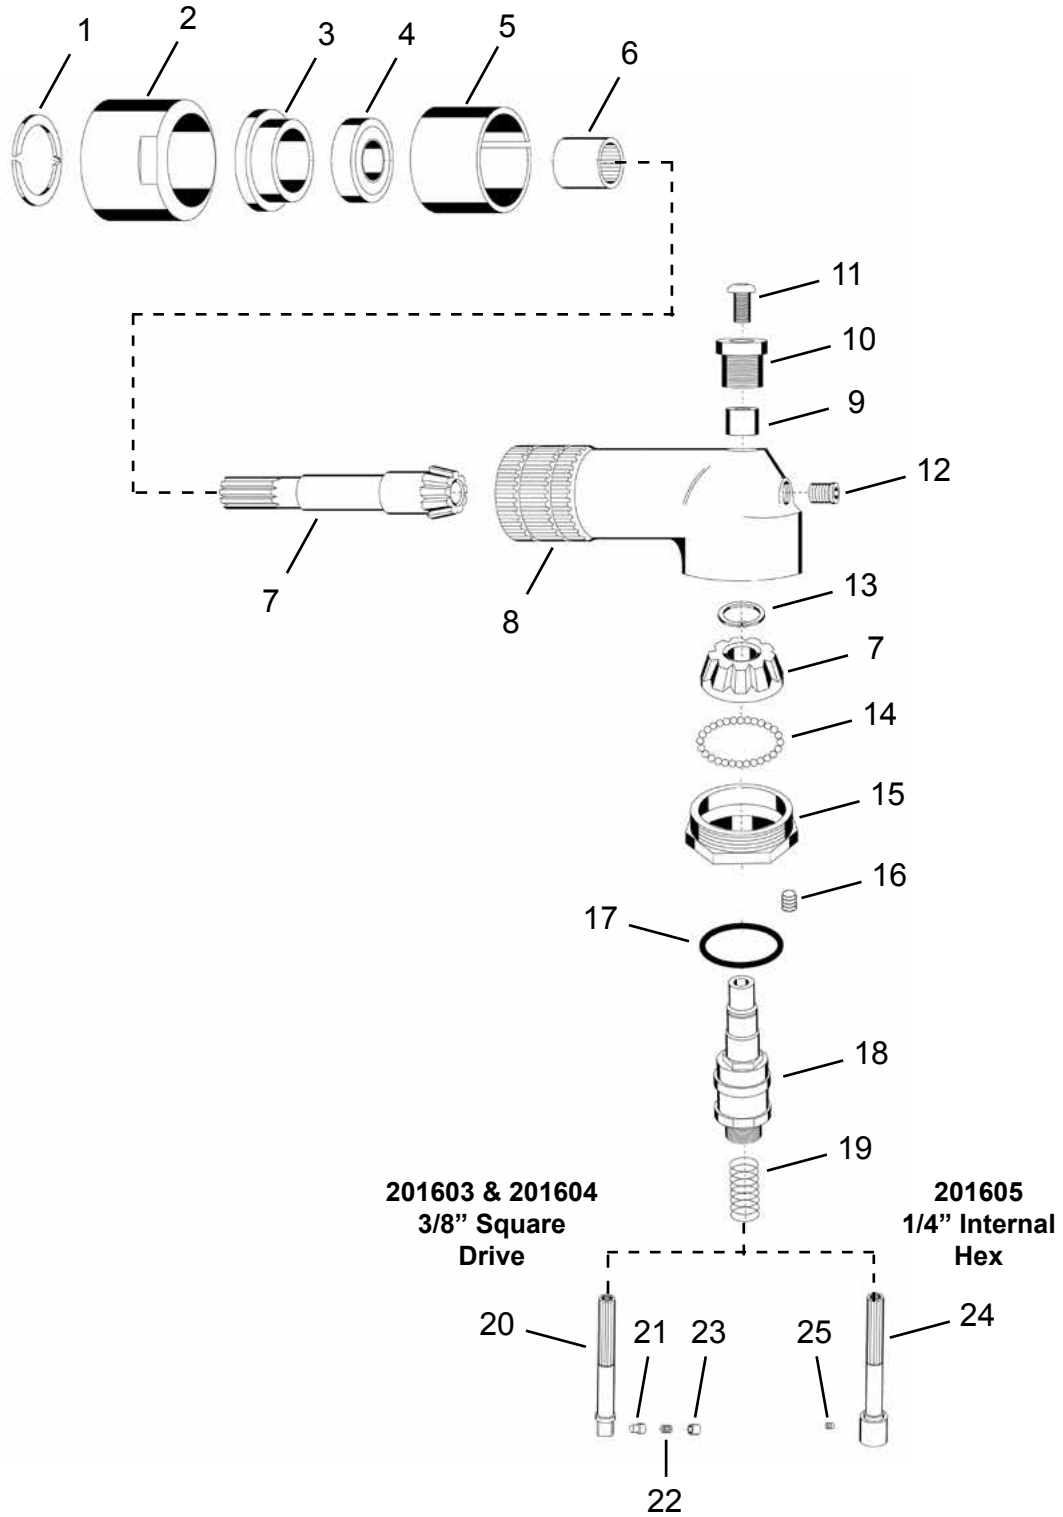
": Right Angle Hold & Drive Attachment - Code "THD"
